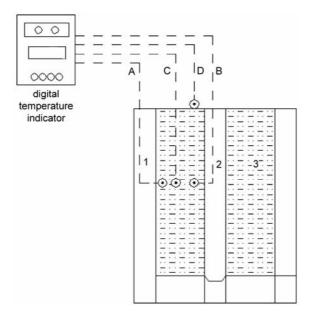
Experimental setup and thermocouple locations: A – thermocouple placed at the molten metal—mould interface, B – thermocouple placed at the molten metal—core interface, C – thermocouple placed at the centre of the molten metal, D – thermocouple placed at the surface of the molten metal;  $1 - CO_2$ —sand mould,  $2 - CO_2$ —sand core, 3 – molten metal
